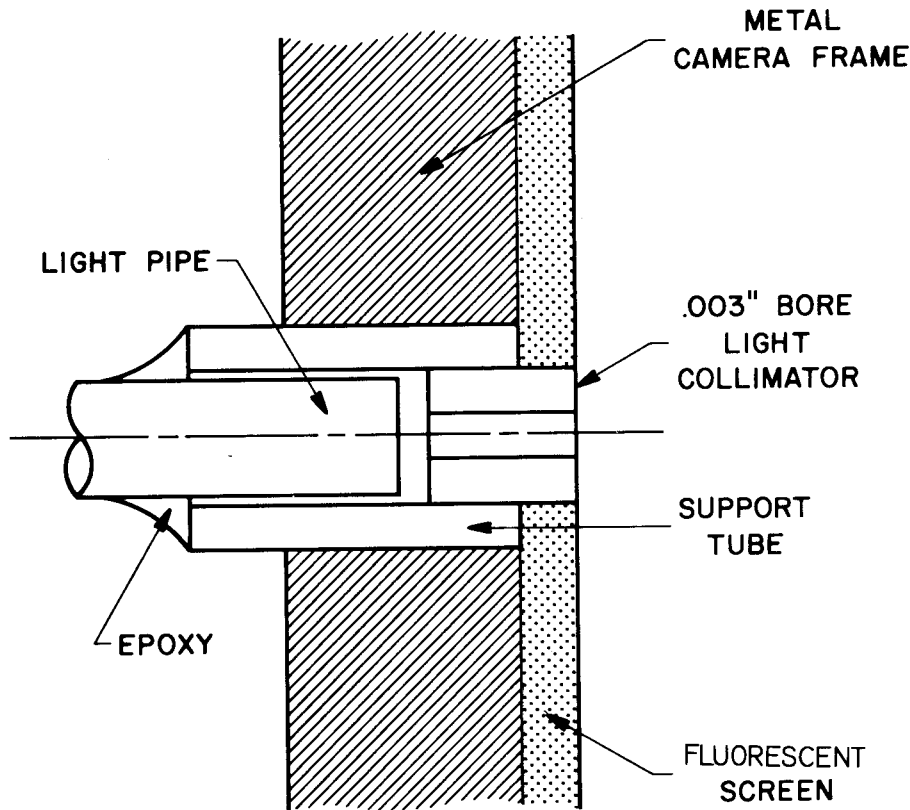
Section of Laue Camera Platen Showing Light Pipe and Collimating Tube
